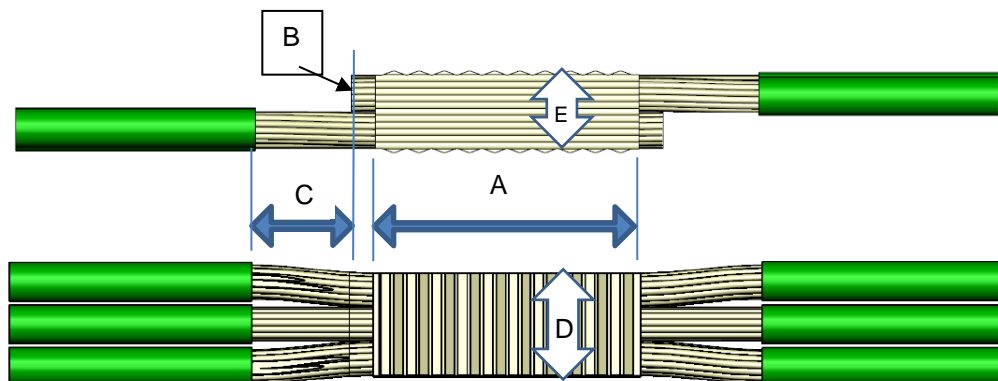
WELD FEATURES PER TABLE 1- SIDE VIEW (ABOVE) AND TOP VIEW (BELOW)
